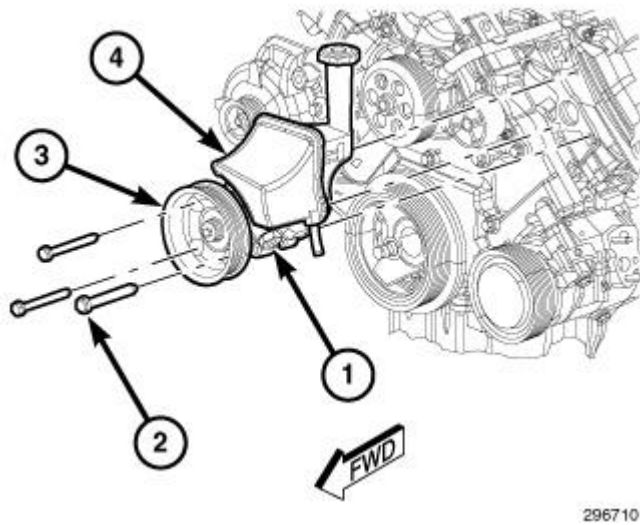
Power Steering Reservoir, Pump, Pulley & Bolts
